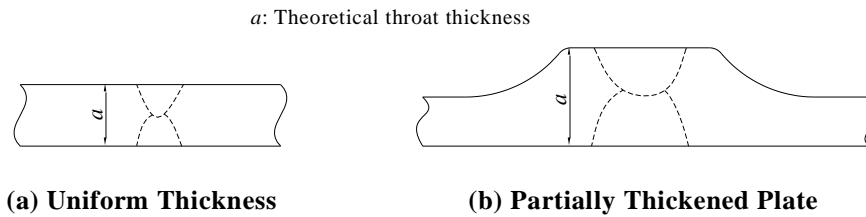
Theoretical Throat Thickness of Friction Stir Welded Joints
